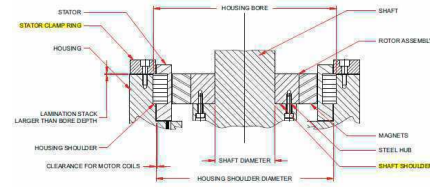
Motor Mounting Using Direct Bolting of the Rotor to the Shaft
